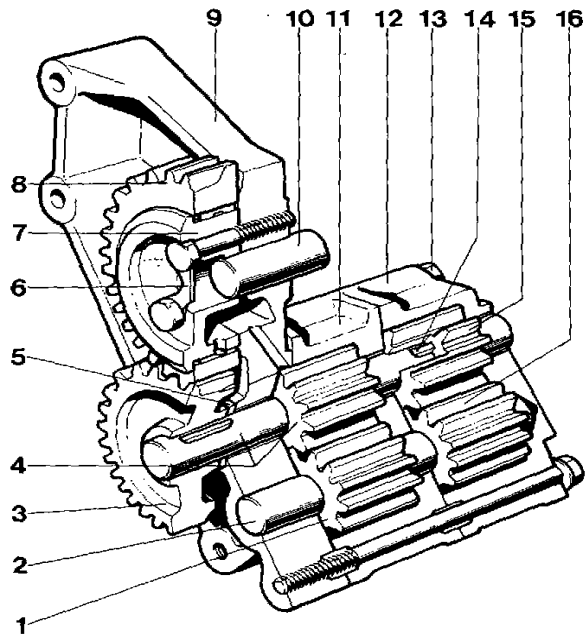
Lubricating oil pump. Engines with shallow sump for large inclinations.
